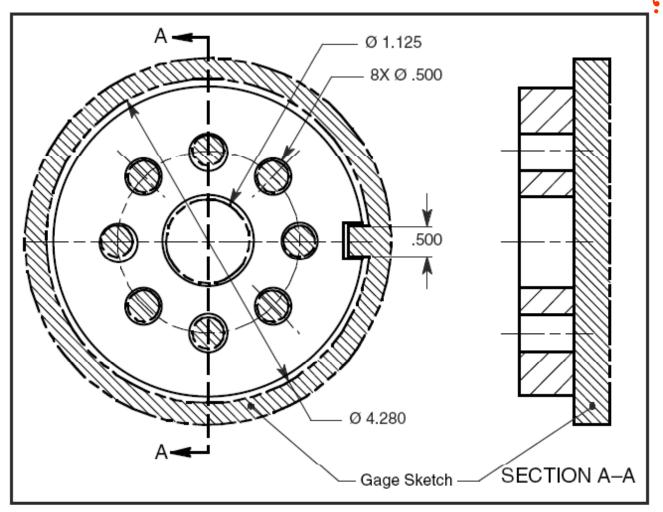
A gage sketched about the part in Fig. 14-12 illustrates a shift tolerance.
